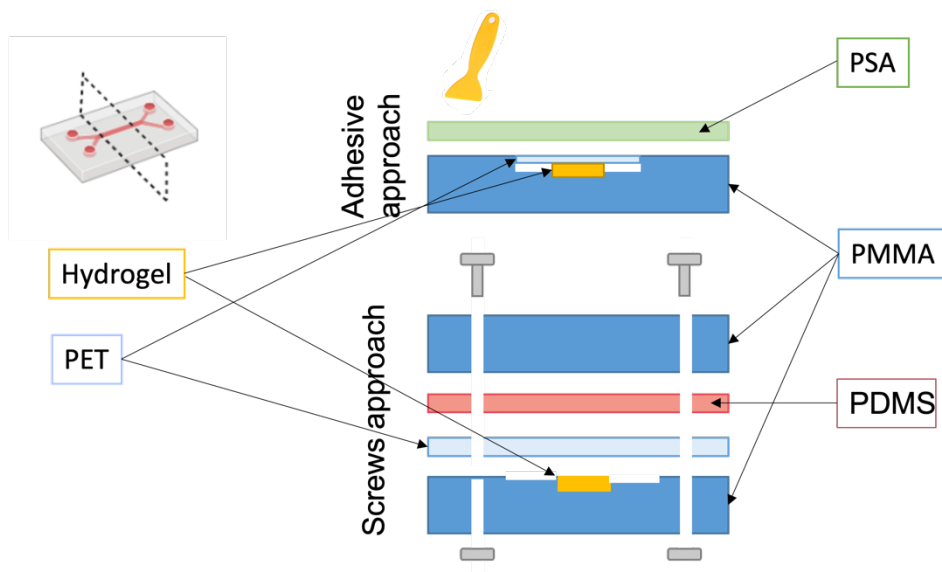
Cross-section view of the two bonding techniques using adhesives or screws.
